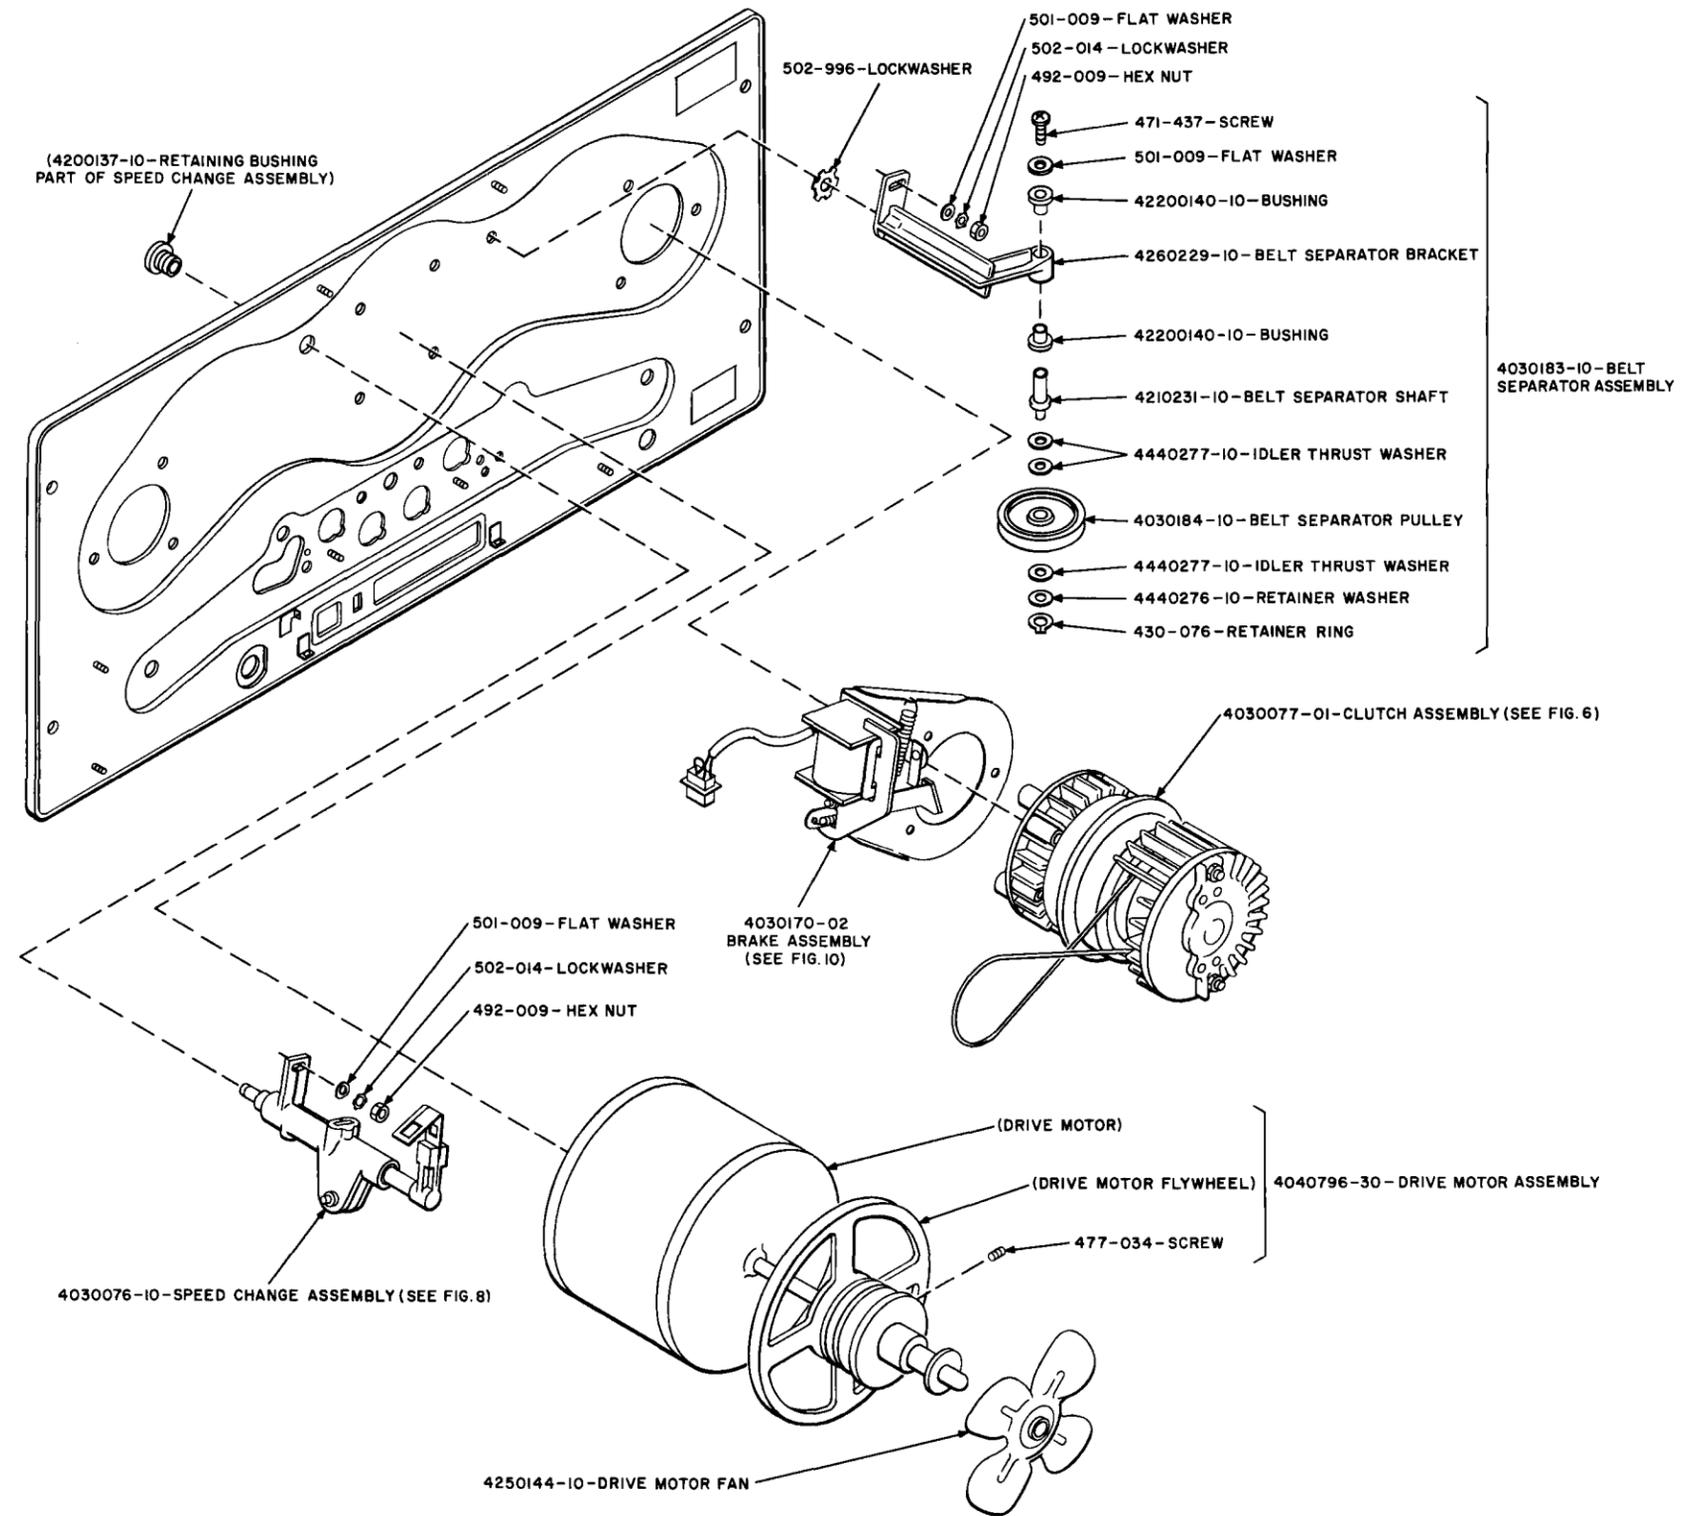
Record-Reproduce Mechanism—Removal of Drive Motor, Clutch, Brake, and Speed Change Assembly
